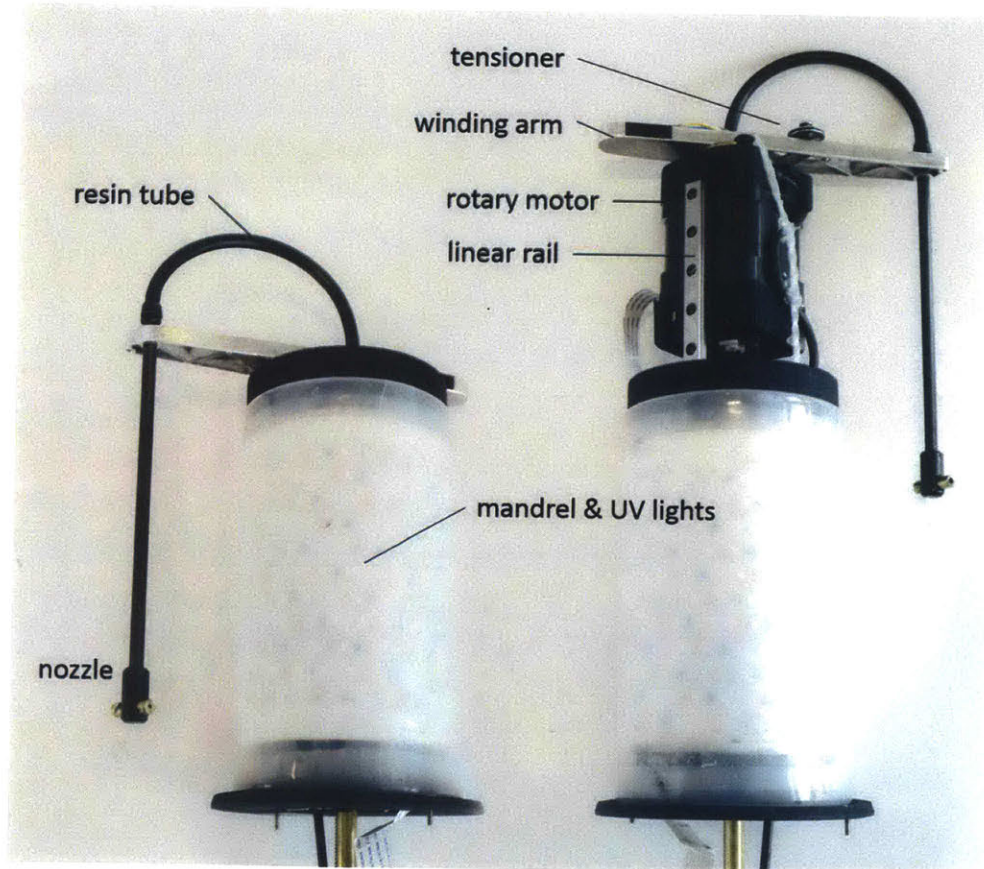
The mandrel and winding arm sub-assembly (mobile carriage is removed) are shown here. On the left, the winding arm is fully retracted, on the right, it is fully extended, and shows the range of linear motion. The black component on the right is the rotary motor with a rotary fluid union and electrical slip ring attached to it.
